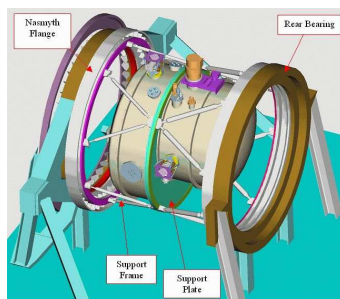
Drawing of EMIR showing the main parts and the compact design. The outer shield is a cryostat
